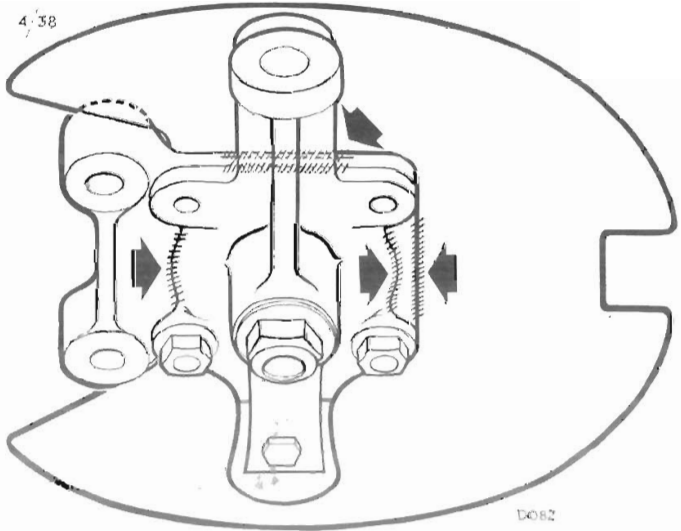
Positions of Expandite Seal-a-Strip between disc brake caliper bracket and vertical link
